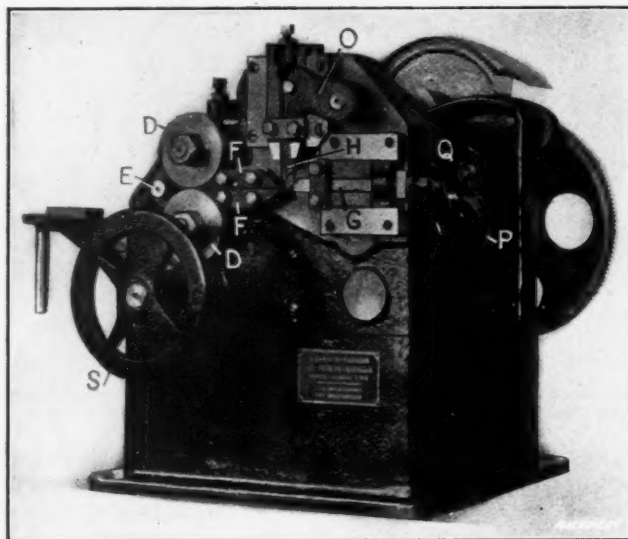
Front View of Sleeper & Hartley Spring Coiling Machine
